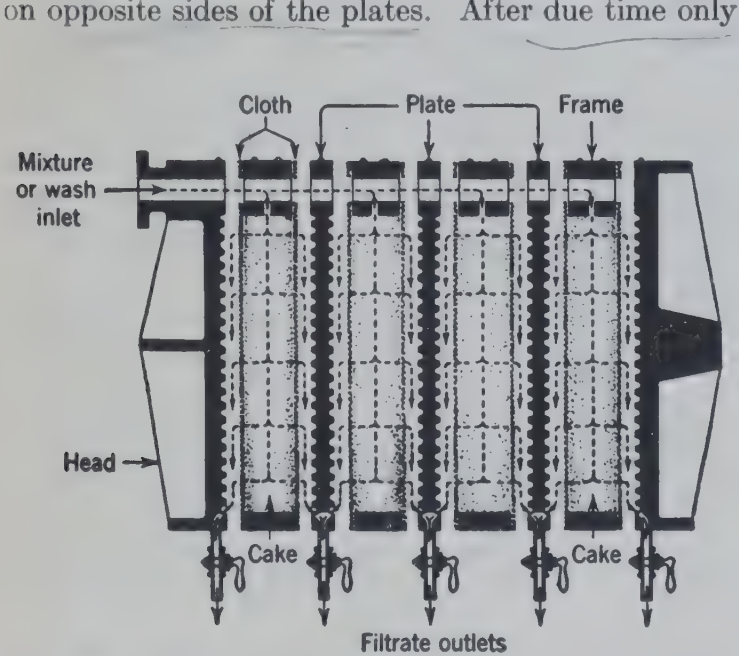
Exploded sectional drawing of an open-delivery filter press using only one and two button plates. (T. Shriver and Co.)
